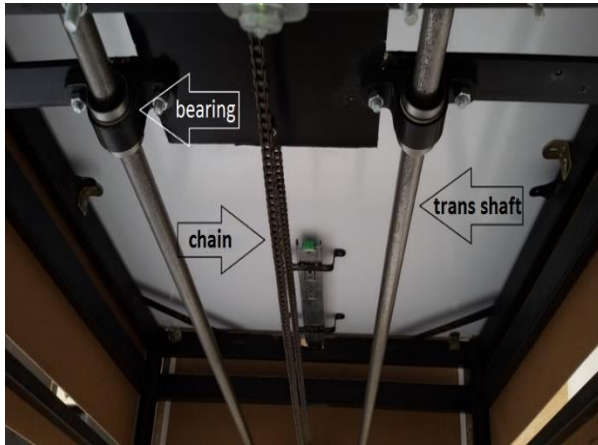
Final assembly of semi-automatic foam cutting hot wire machine.
